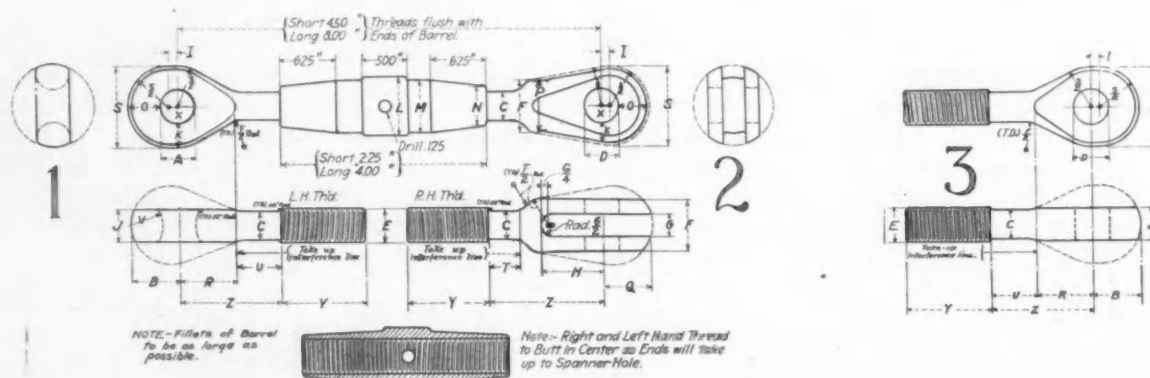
DIMENSIONS OF PROPOSED S. A. E. TURNBUCKLE
